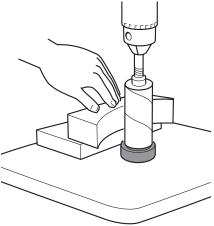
$\frac{7}{8}$ " thick spacer board.
